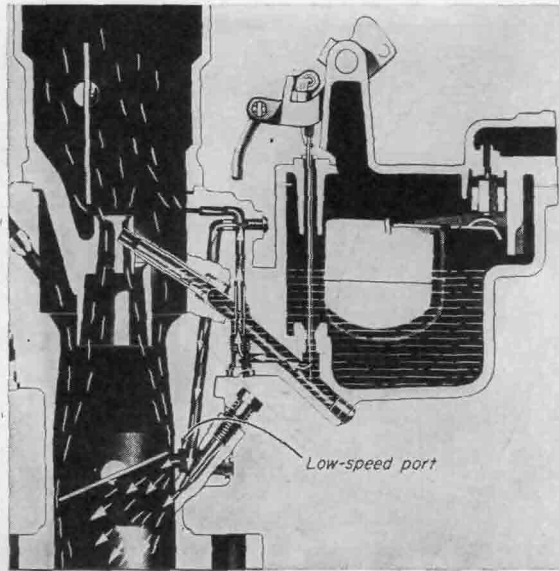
Idle-and-low-speed circuit in carburetor. Throttle valve is slightly opened, and gasoline is being fed through low-speed port. Lines indicate air; arrows indicate gasoline. (Chevrolet Motor Division of General Motors Corporation)
